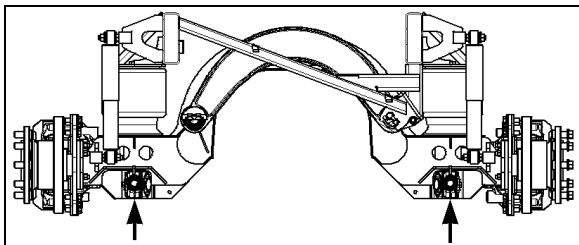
JACKING POINTS ON TAG AXLE 11029
